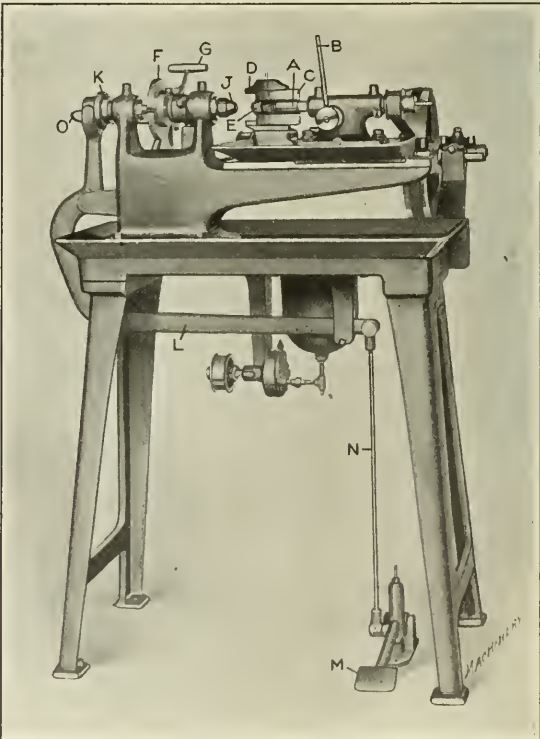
Front View of High-speed Horizontal Drilling Machine with Indexing Attachment, used in drilling Concussion Primer
